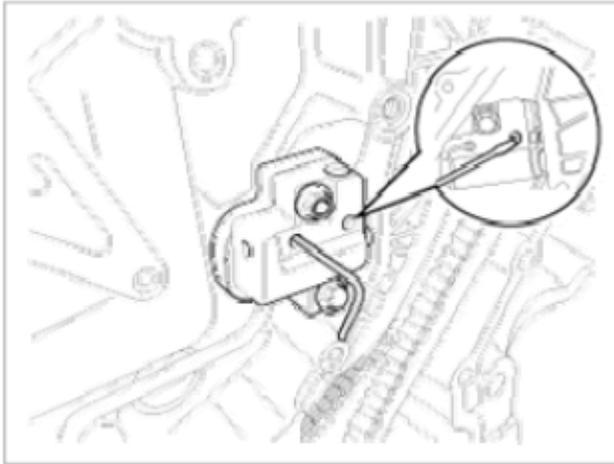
Pulling Out Pins Of Hydraulic Tensioners (LH)
